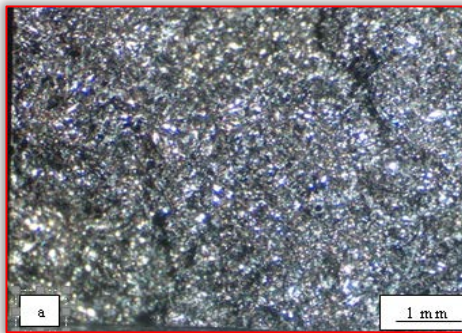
Fracture surface of cylinder head in the combustion chamber after tensile testing
